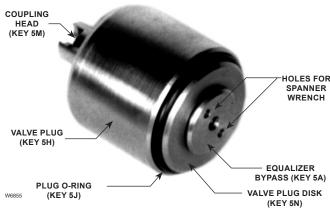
Valve Plug (Key 5) and Equalizer Bypass Assembly for NPS 1 through 6 / DN 25 through 150 Body Sizes
